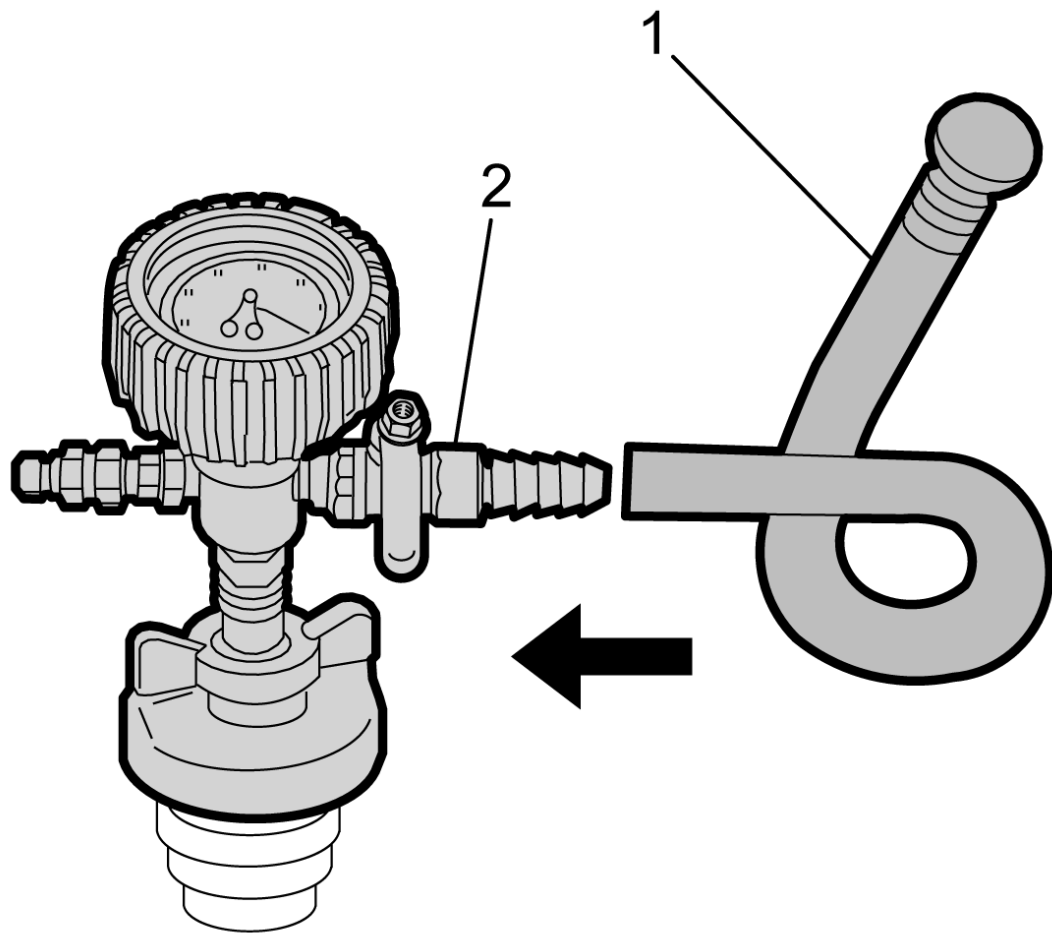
Vacuum Gauge Assembly & Fill Hose
